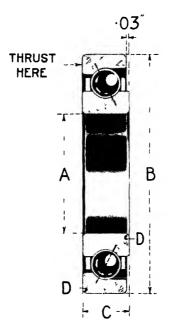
R. AND M COMBINED RADIAL AND ONE-WAY THRUST BEARING
